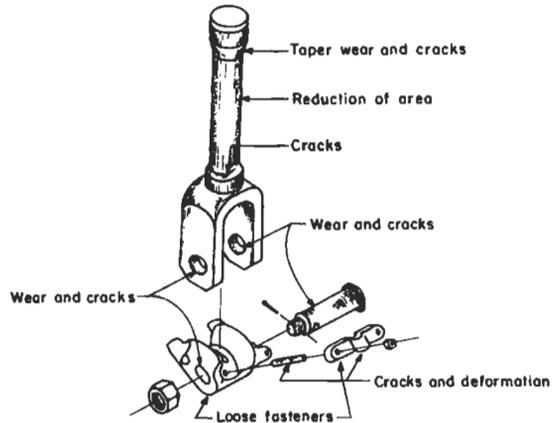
Casing, tubing, and drill pipe elevators, slip type elevators [10].
